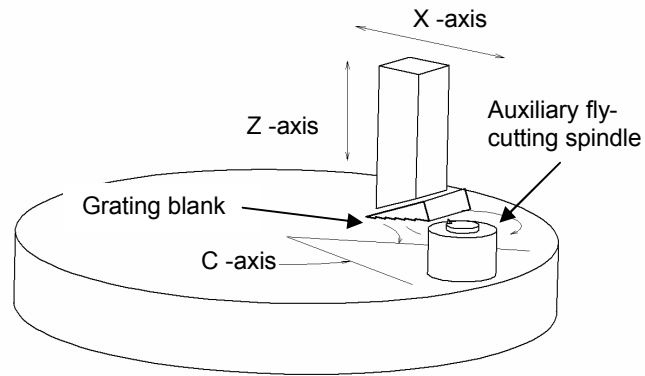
This is the LODTM setup for cutting a large grating. An auxiliary flycutting spindle that holds the diamond tool bit is mounted to the large spindle face that rotates about the C axis.
